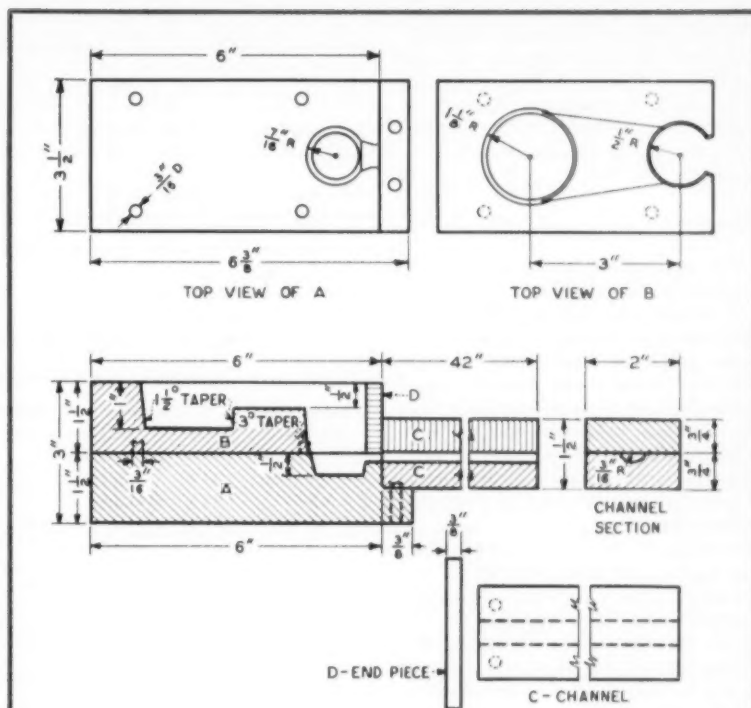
Assembly of fluidity test mold shows its simple construction.
